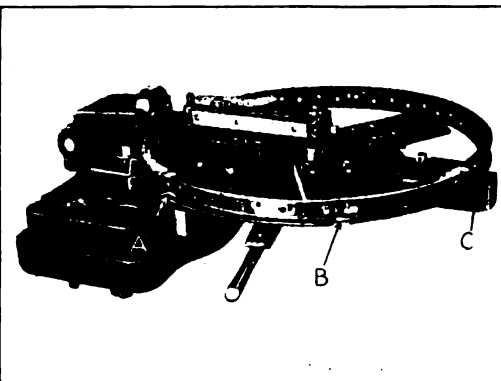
PUNCH AND INDEXING FIXTURE FOR LUG SPACES
